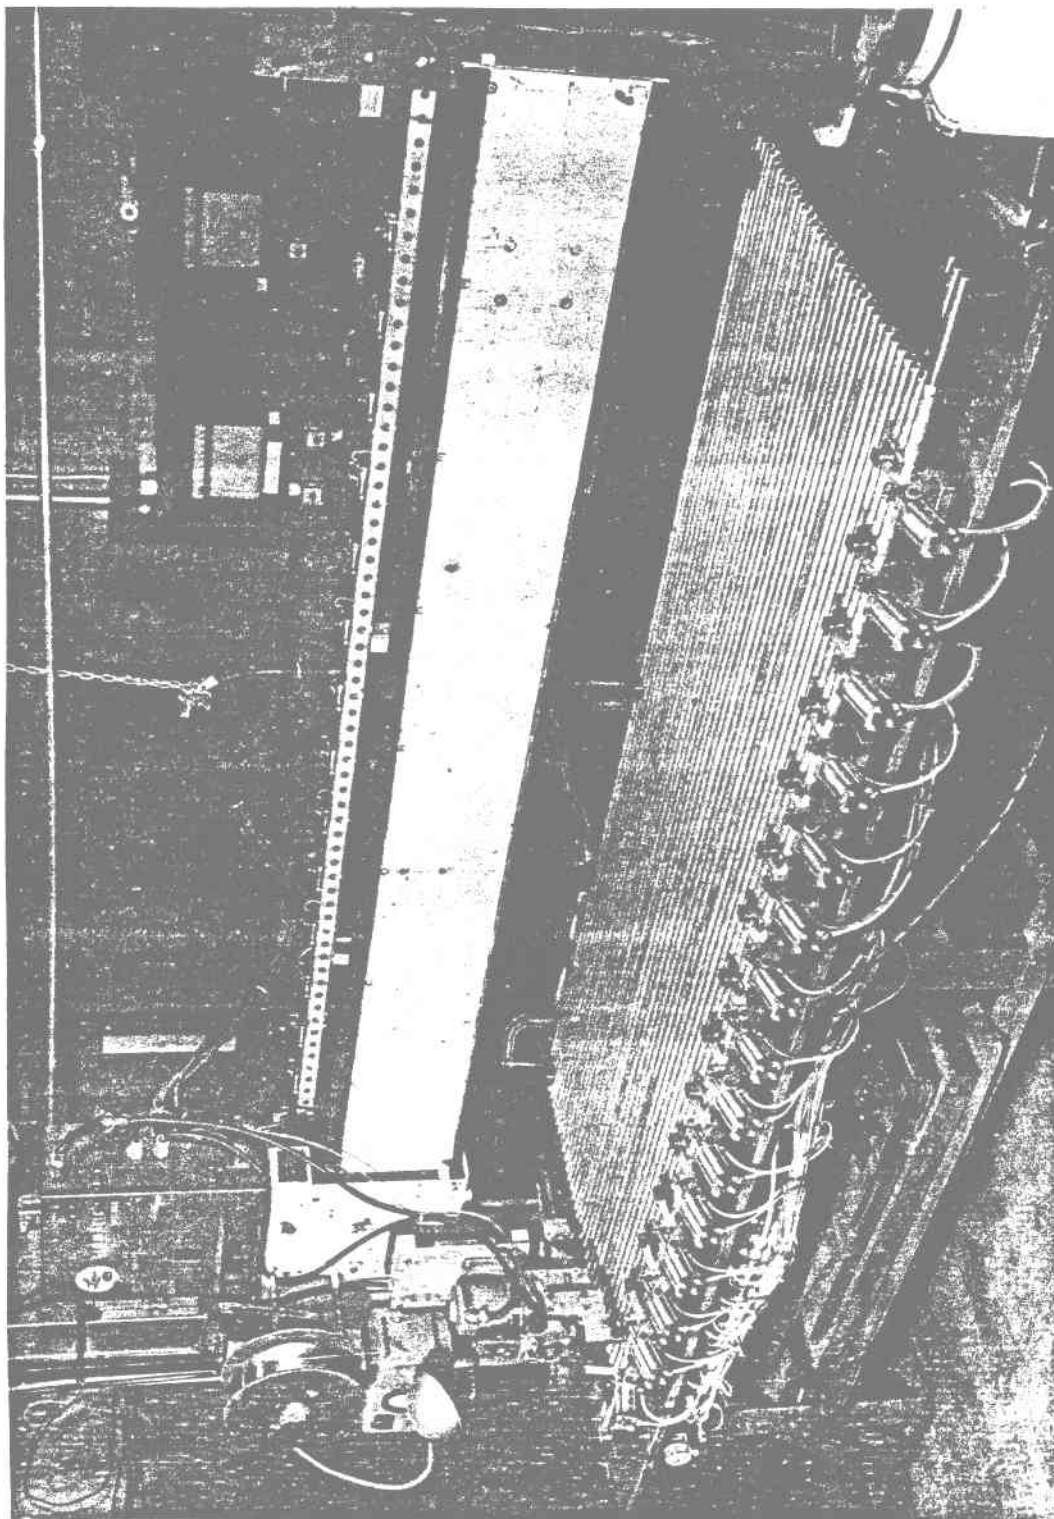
Fixture Employed During Fabrication of Second Development Panel
